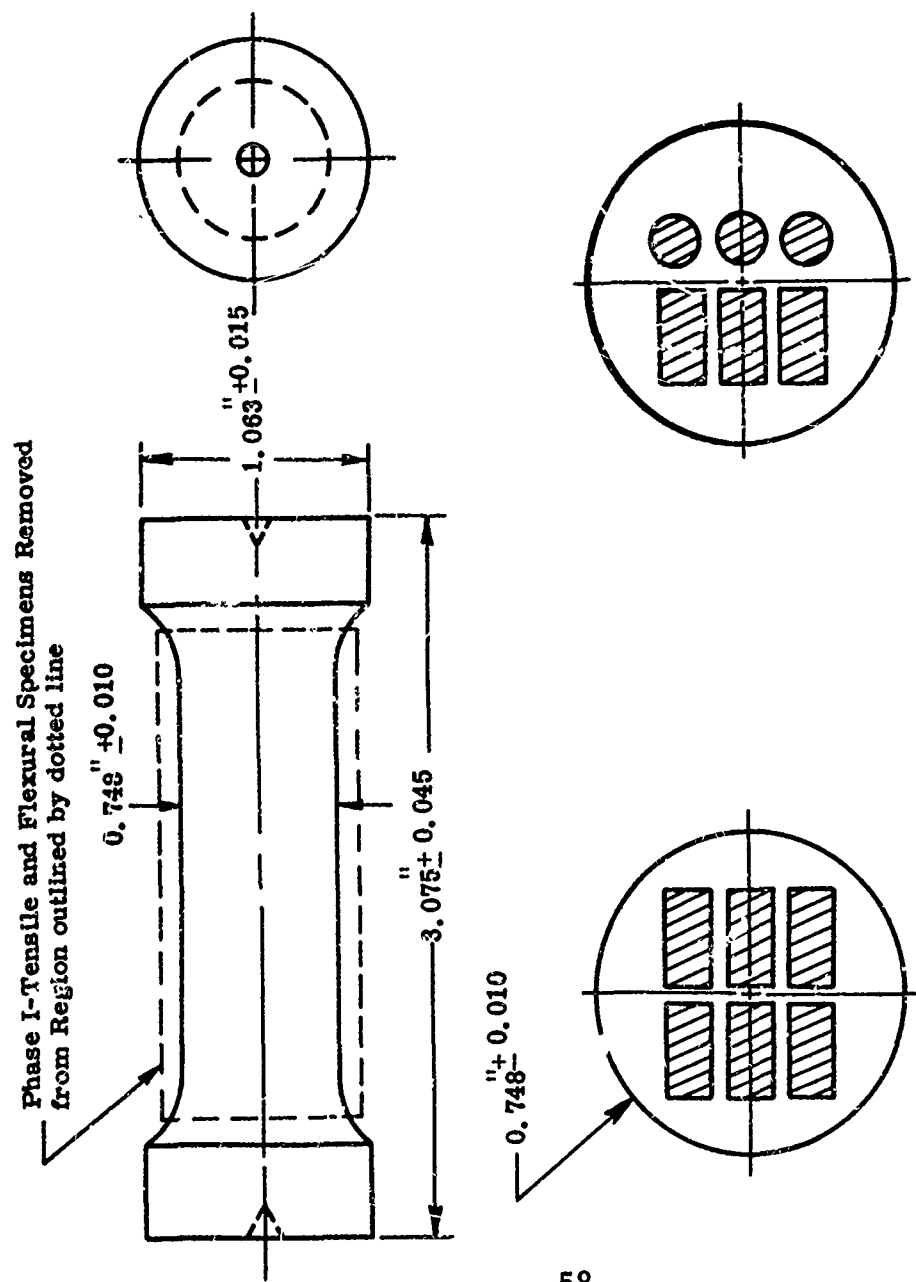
Configuration of Specimen Blank 1831-A-8 as received from Coors and Cutting Plan for Removing Phase I Macro Tensile and Macro Flexural Specimens
